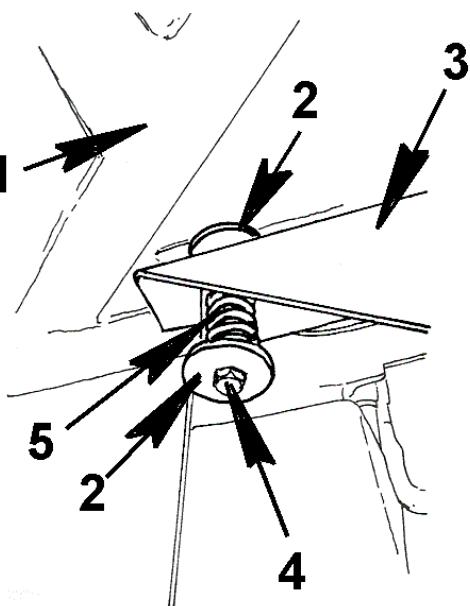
Outrigger Tension Bolt Assembly Remove (Street Side Shown)
